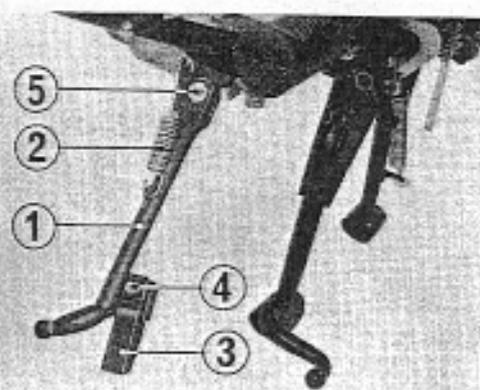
① Side stand bar ④ 6mm bolt
